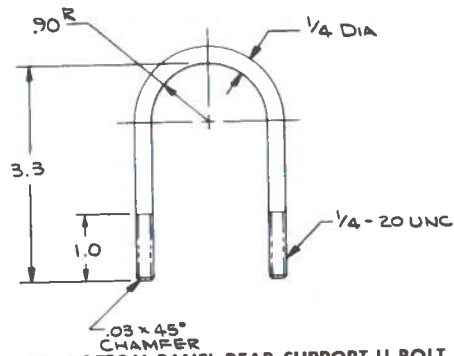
BOTTOM PANEL REAR SUPPORT U-BOLT
